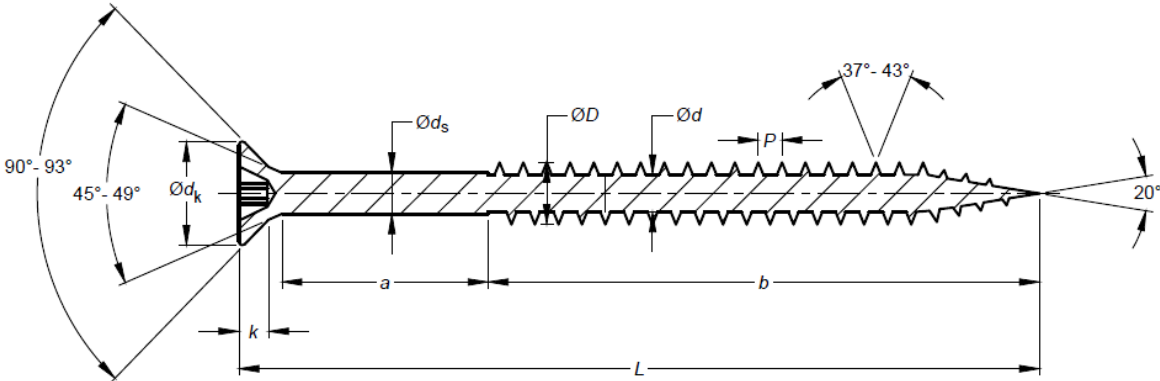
(b) PARTIALLY THREADED CHIPBOARD SCREWS
